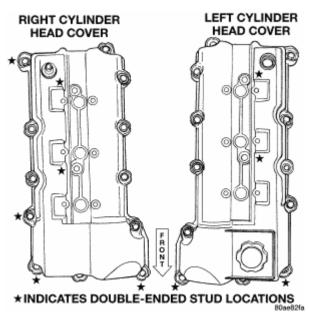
Identifying Cylinder Head Covers Courtesy of CHRYSLER LLC
